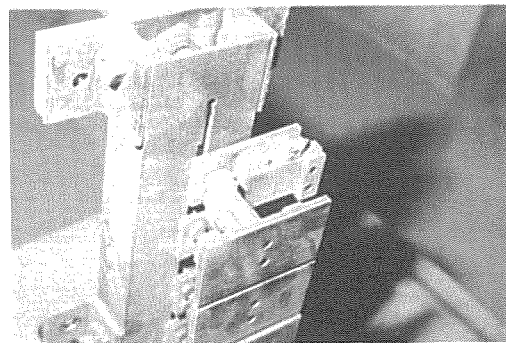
(b) Detailed view of sensing device attached to the track assembly.
